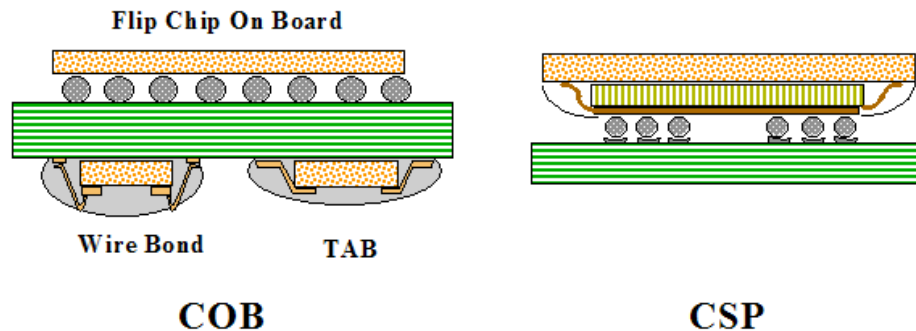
Chip-on-board/flip-chip die attachment and chip scale package configurations.
